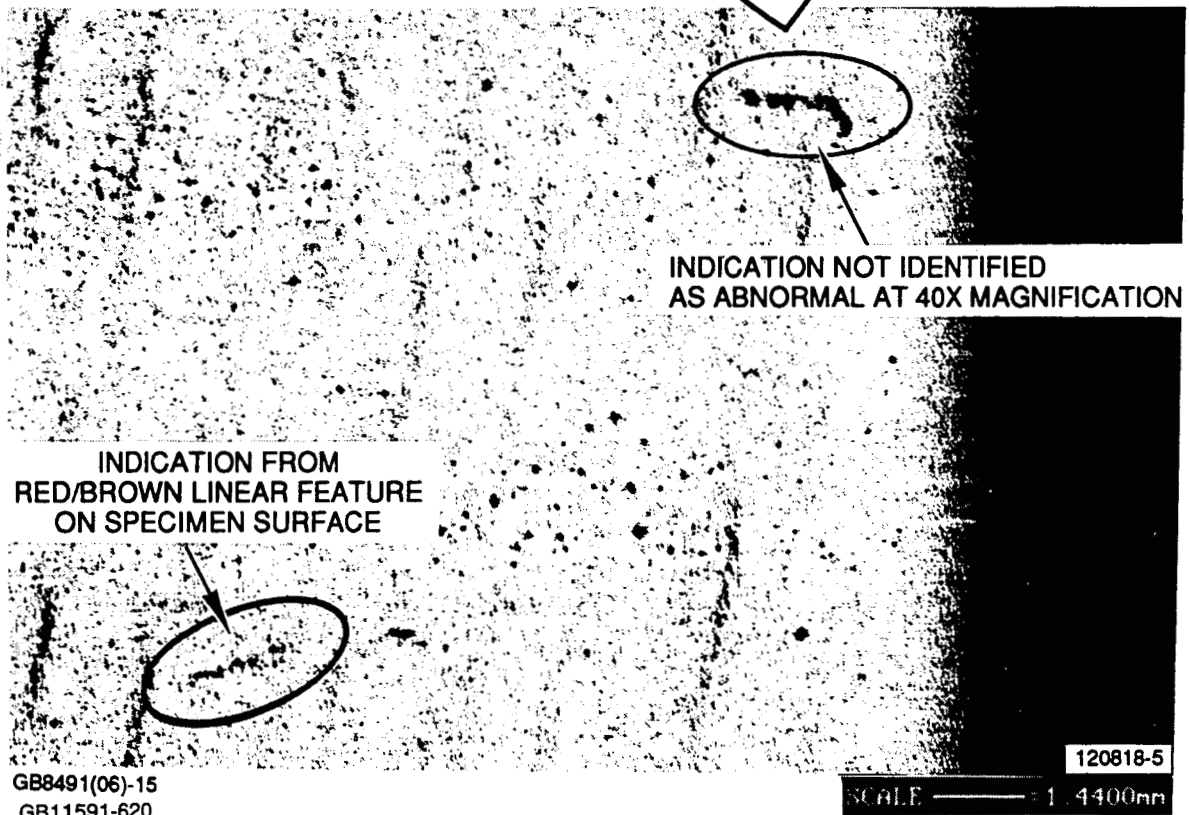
Acoustic Microscopy Indications Confirmed By Visual Inspection As Atypical Of The Machining Process Were Removed Prior To Testing.
